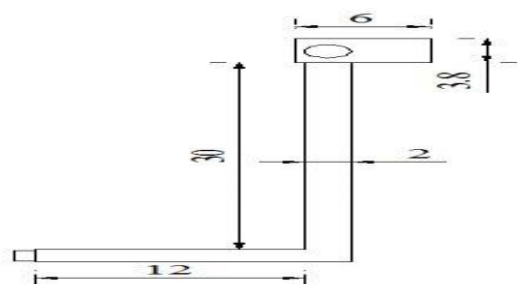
Design view of the pressure case cap (all dimensions are in cm).
